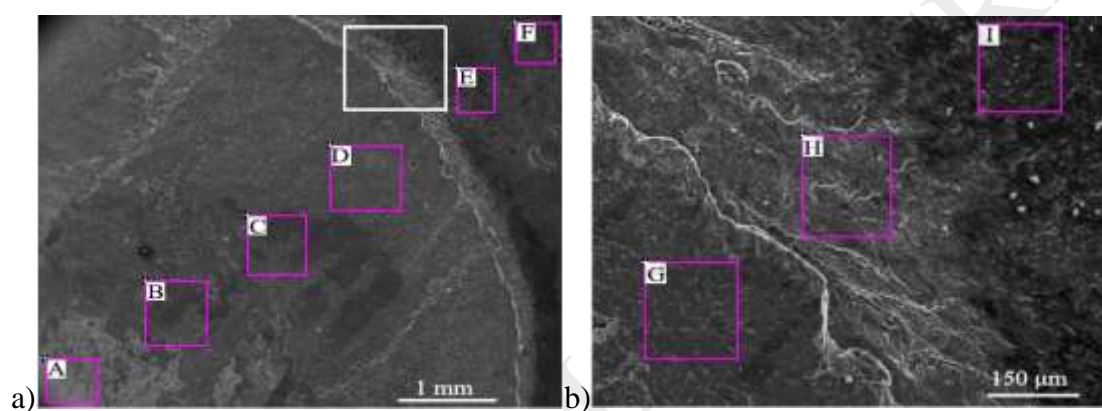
Fracture surface of the Al5754/AlSi coated steel weld: (a) overall and (b) magnified view in the white rectangle in a (1.4 mm penetration, 4.44 kN).
